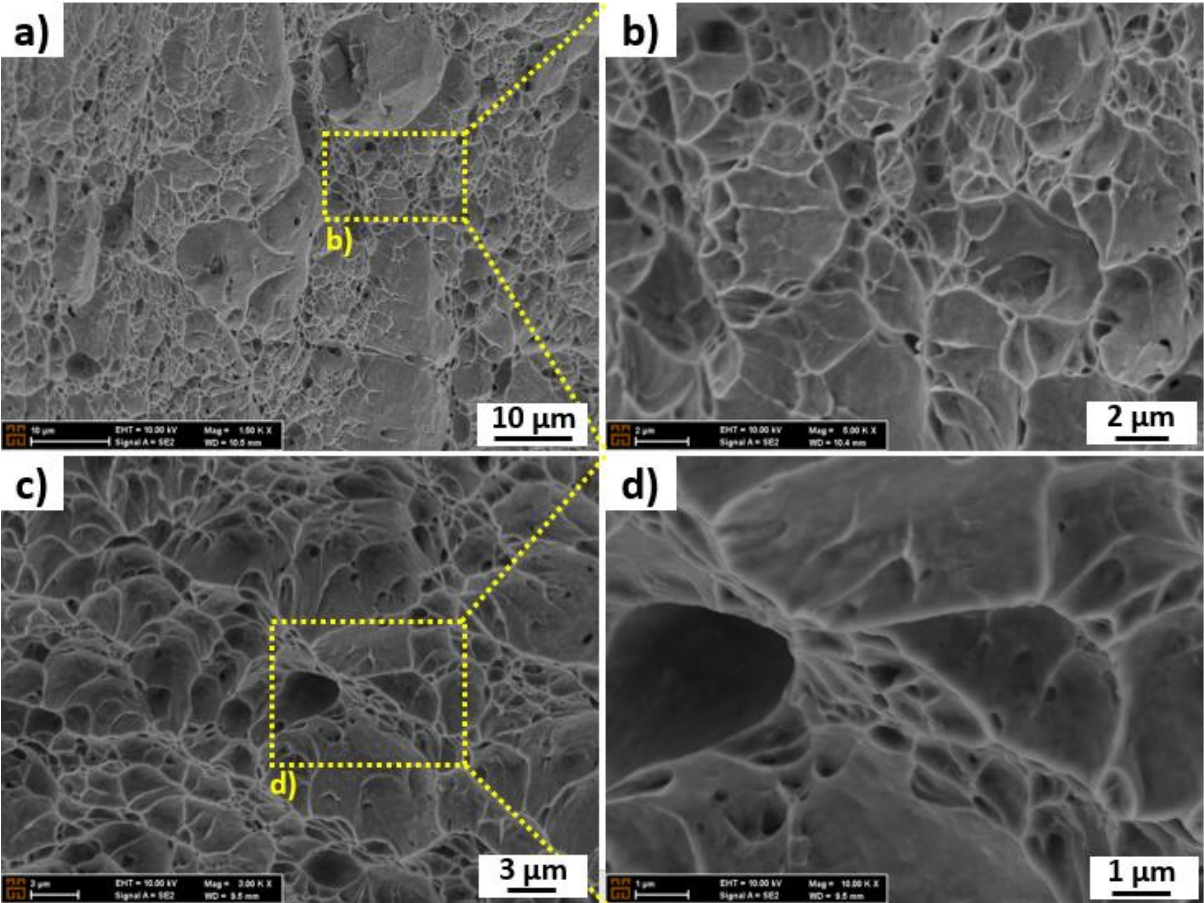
Fracture surface overview of armor steel-1 without hydrogen-charging condition.
